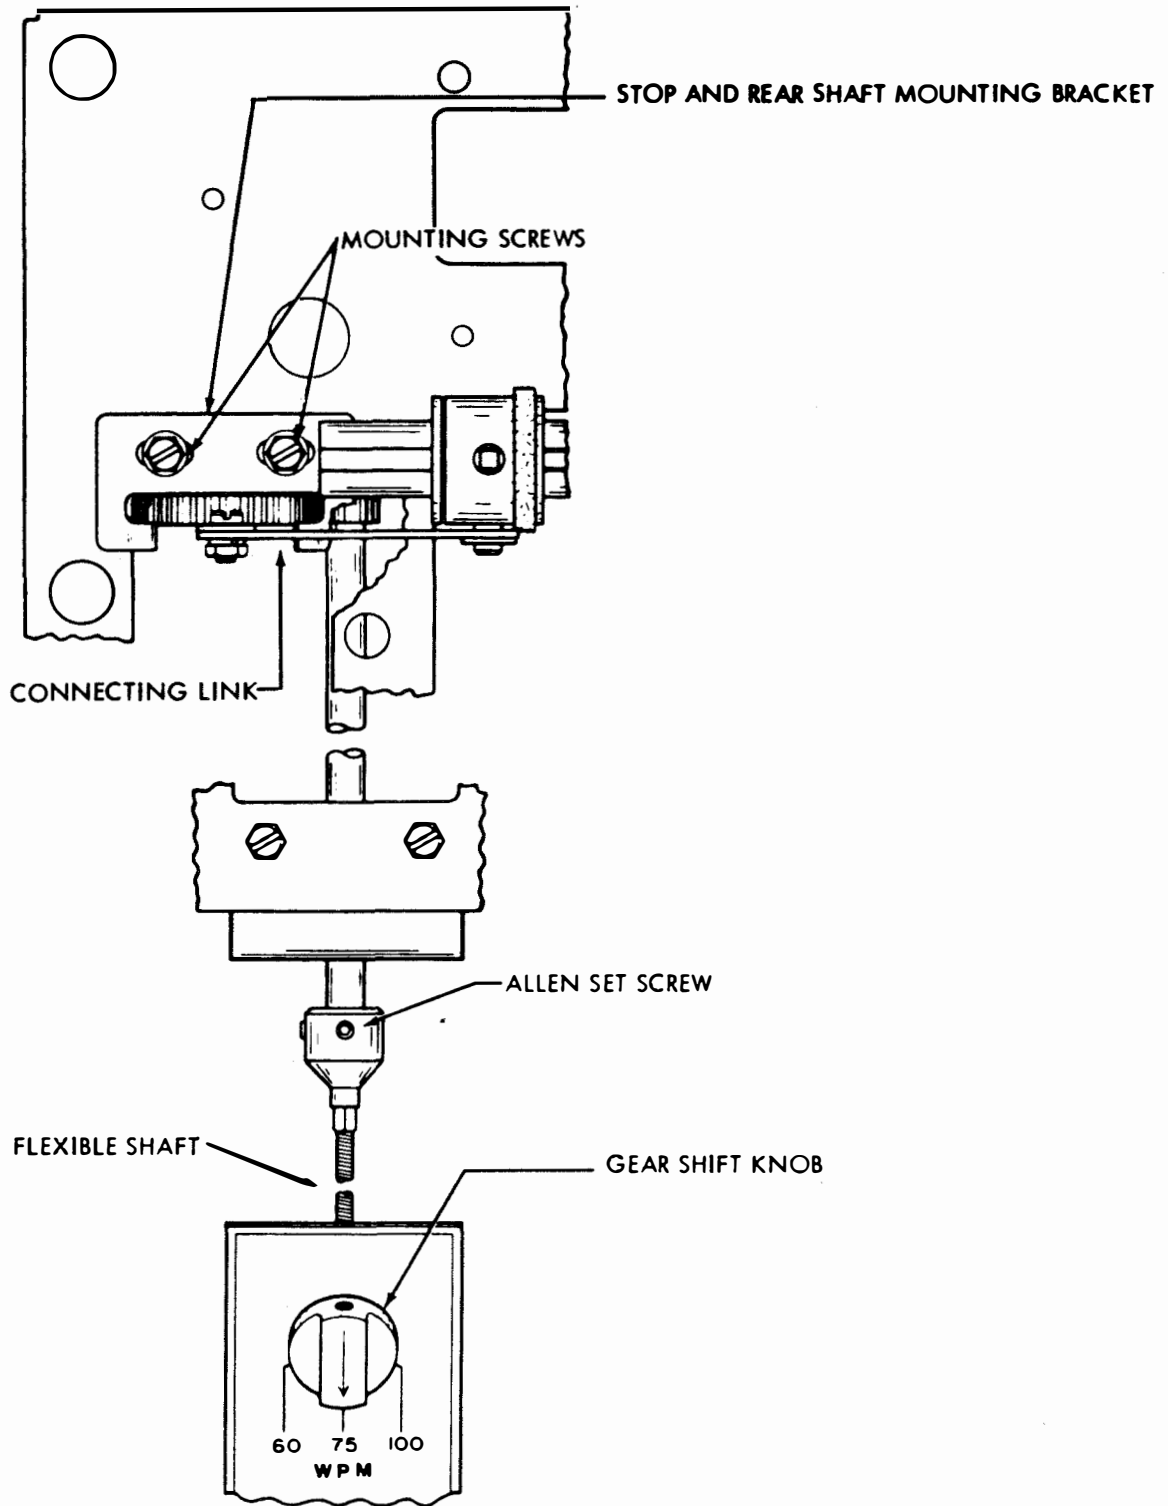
Stop and Rear Shaft Mounting Bracket and Gearshift Knob
